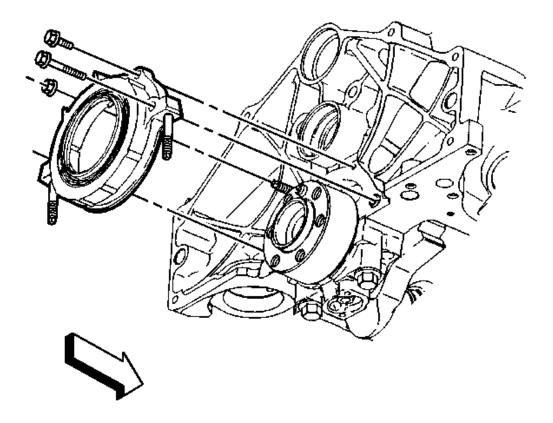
View Of Crankshaft Rear Oil Seal Housing Nuts & Bolts Courtesy of GENERAL MOTORS CORP.
